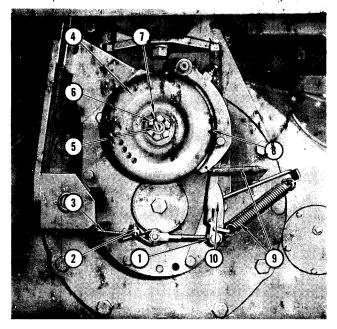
PARKING BRAKE AND AUXILIARY TRANSMISSION
